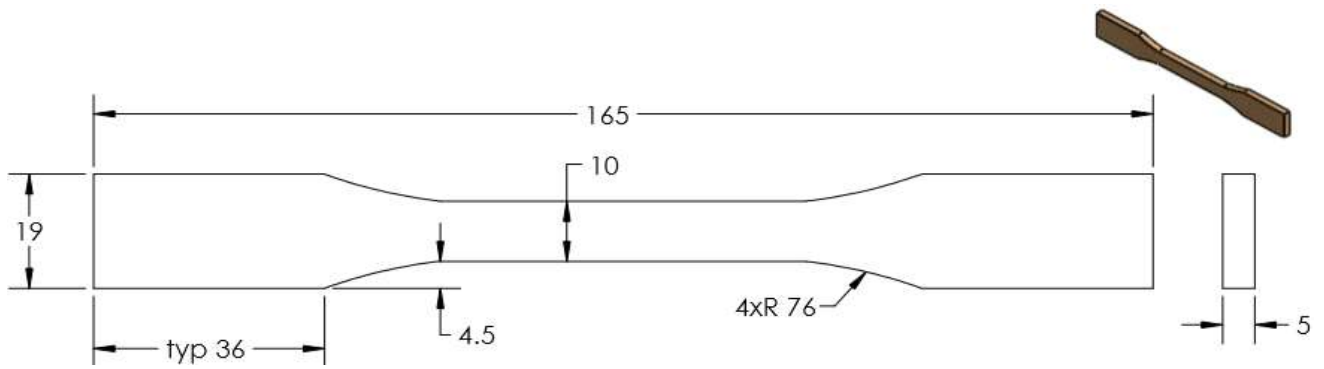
Tensile test Sample size and dimension in mm and prepared pattern from wood using ASTM D 638-02a, 2003 standard size.
